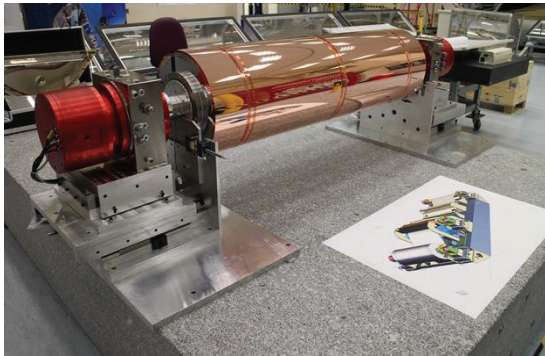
Grating inducing embossing roll mounted on high precision spindle units
